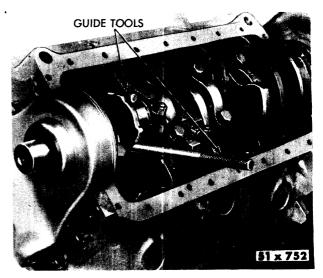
Guiding Connecting Rod Over Crankshaft (Typical)
